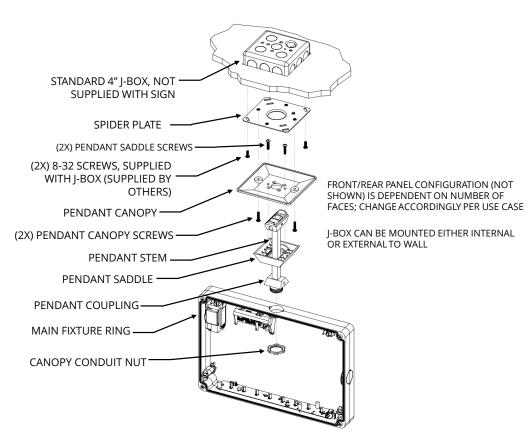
PENDANT MOUNT (SINGLE OR DOUBLE FACE)
